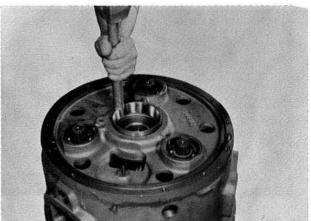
Using a soft bar install turbine shaft inner bearing cup.
